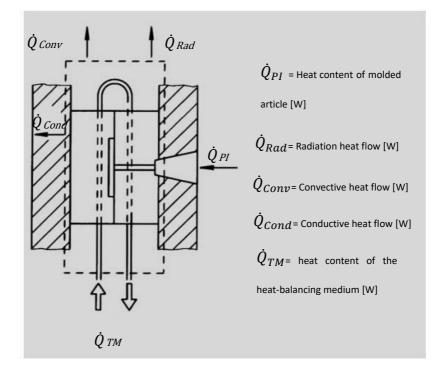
Heat transfer processes in the mold during the injection molding process. Adapted from [12].
